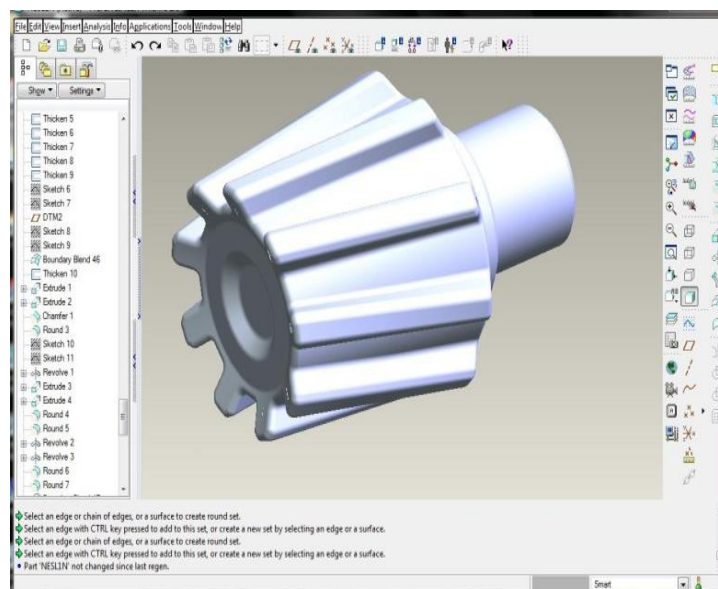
Gear shape modelled in Pro Engineer [34].
